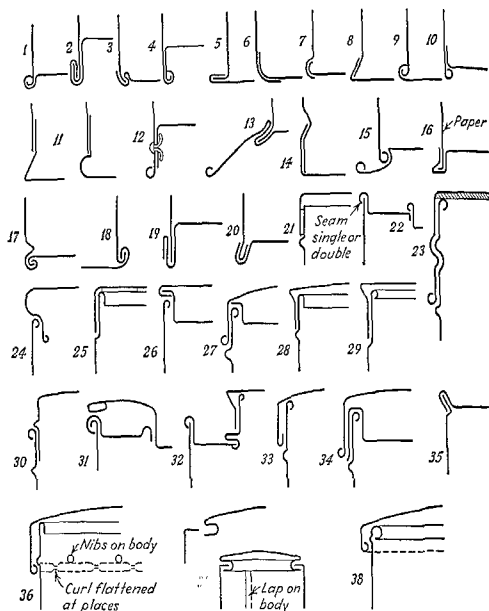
Attachment of tops and bottoms to sheet-metal container. (Mills.¹³)
